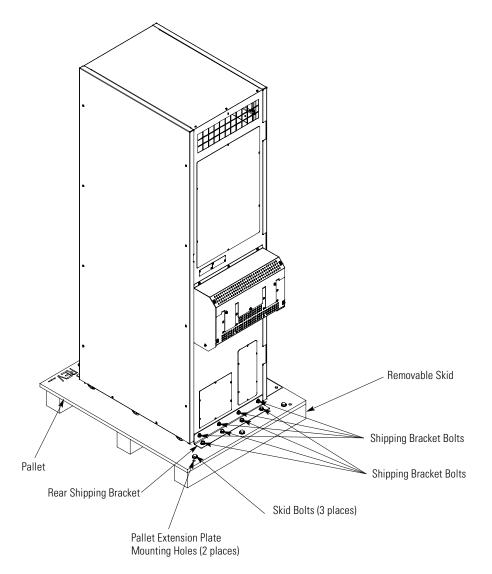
Removing the Rear Shipping Bracket – 93E 60IAC
